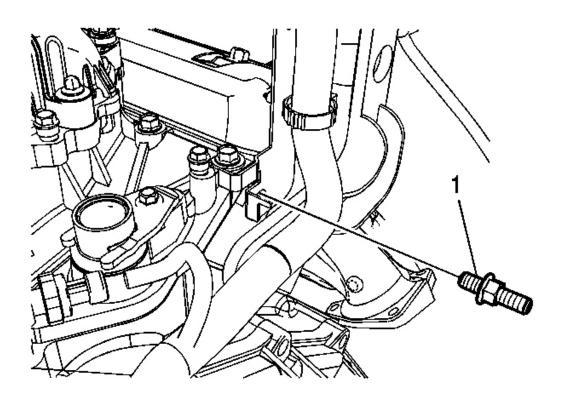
Engine Wiring Harness Bracket Stud Courtesy of GENERAL MOTORS CORP.
